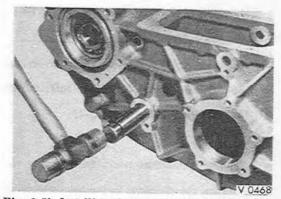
Installing the transfer idle gear shaft in the case.
